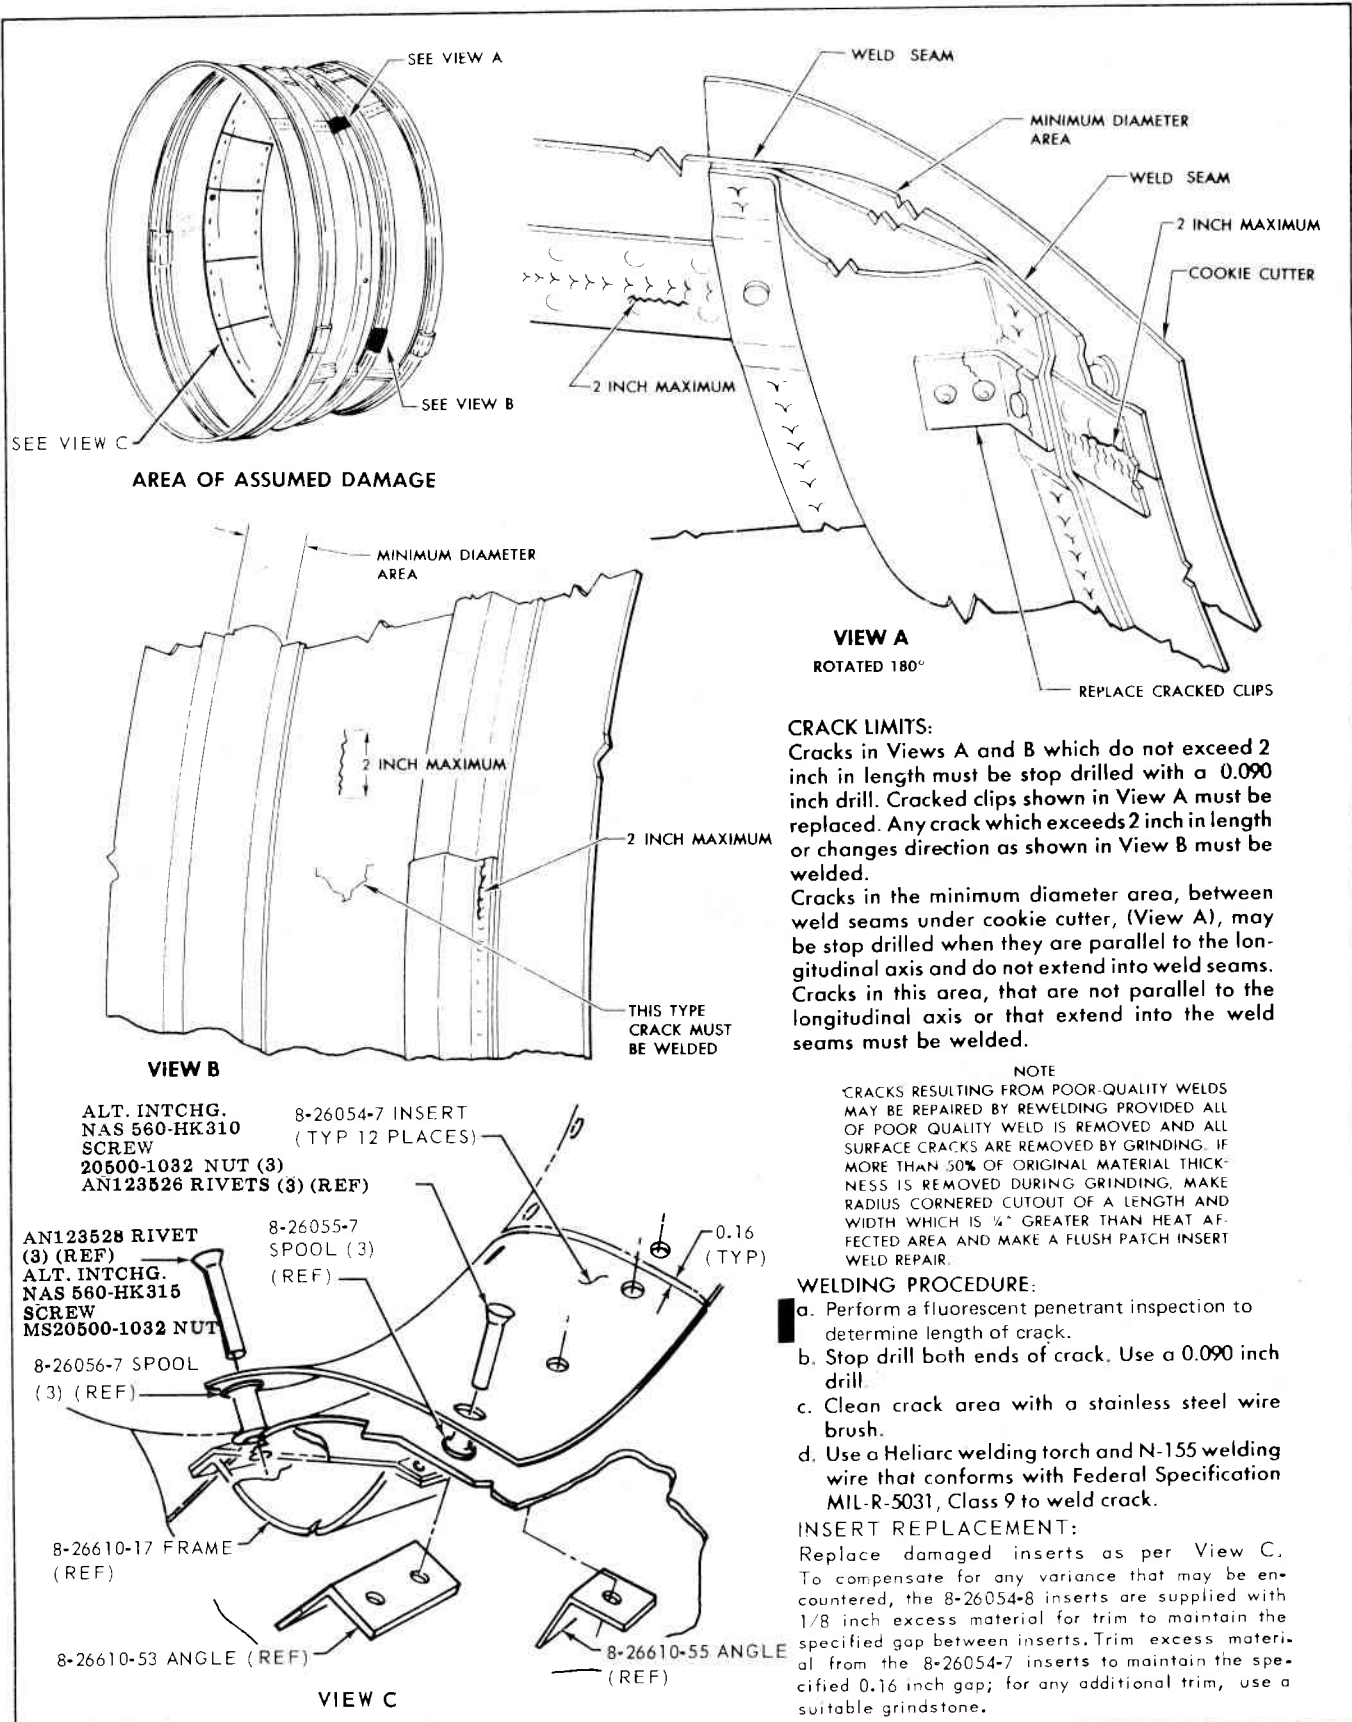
Engine Shroud Blanket Repair (Sheet 1 of 2)
